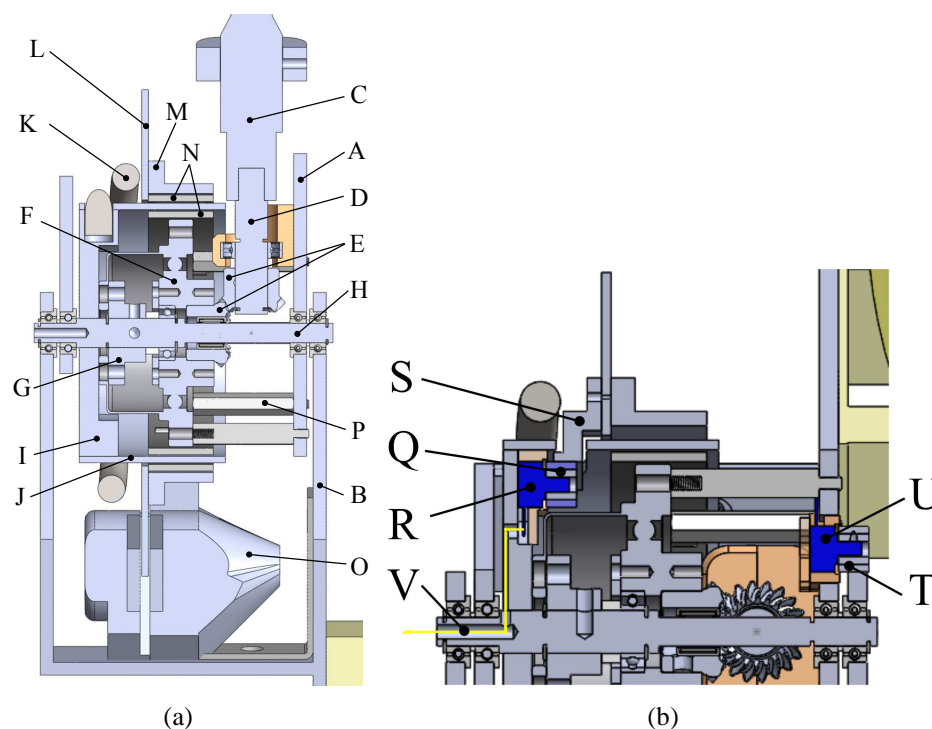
CAD model render of the device: (a) a lateral cross-section along the axis of the flexible shaft attachment, (b) cross-section showing the placement of the two rotary potentiometers.
